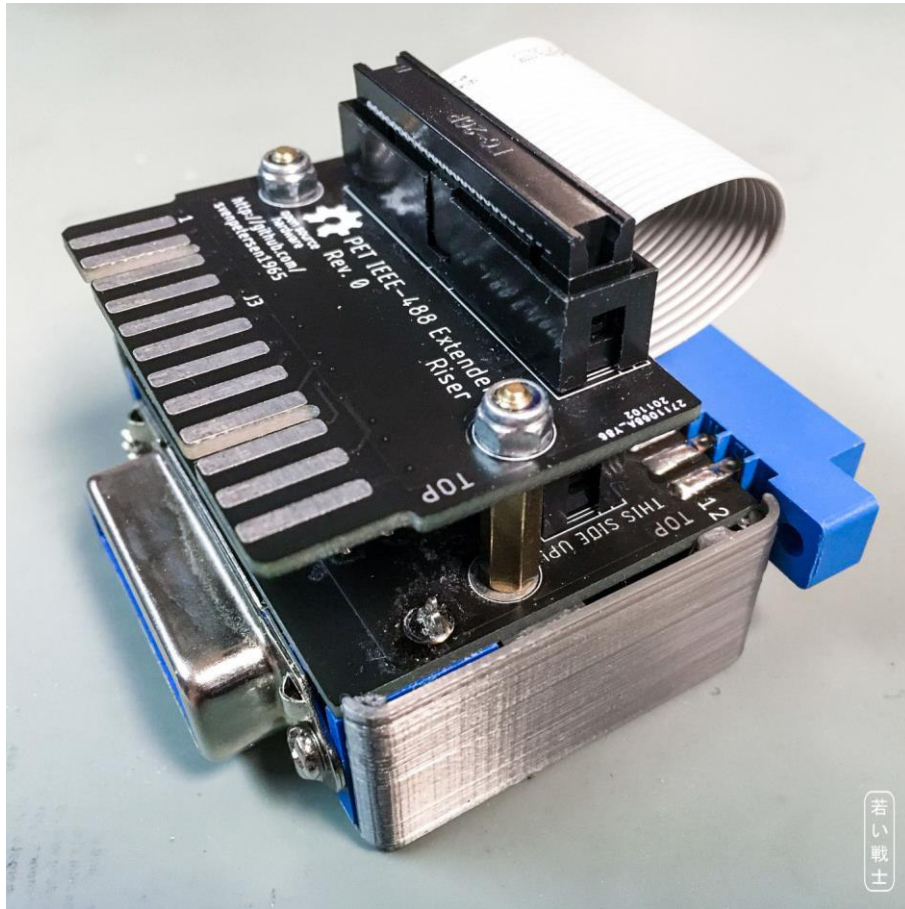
Board stack with Centronics Base and the bottom shell of the Centronics case
